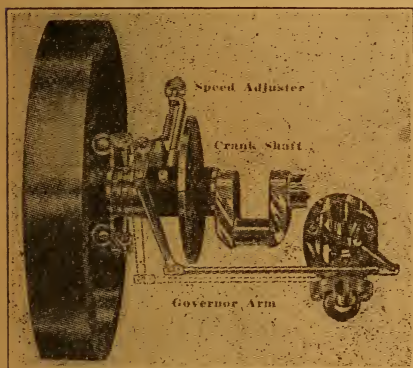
Cushman mechanical governor built in flywheel, showing connection to carburetor.
